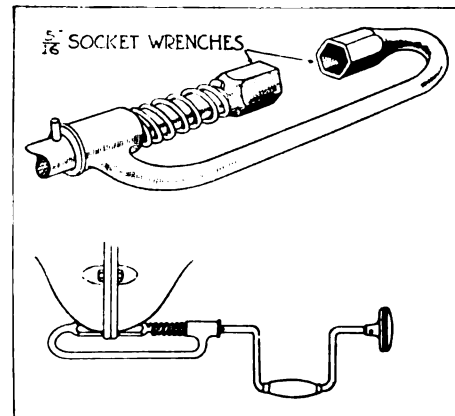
Jew socket wrench for removing differential flange nuts in record time
